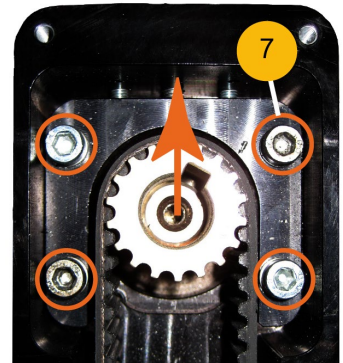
Screws for fixation of drive unit ETH032...ETH080
